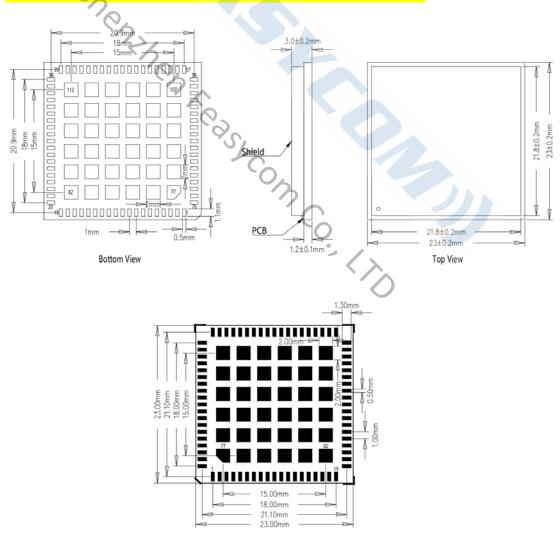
FSC-BW5028MV footprint Layout Guide (Top View)
